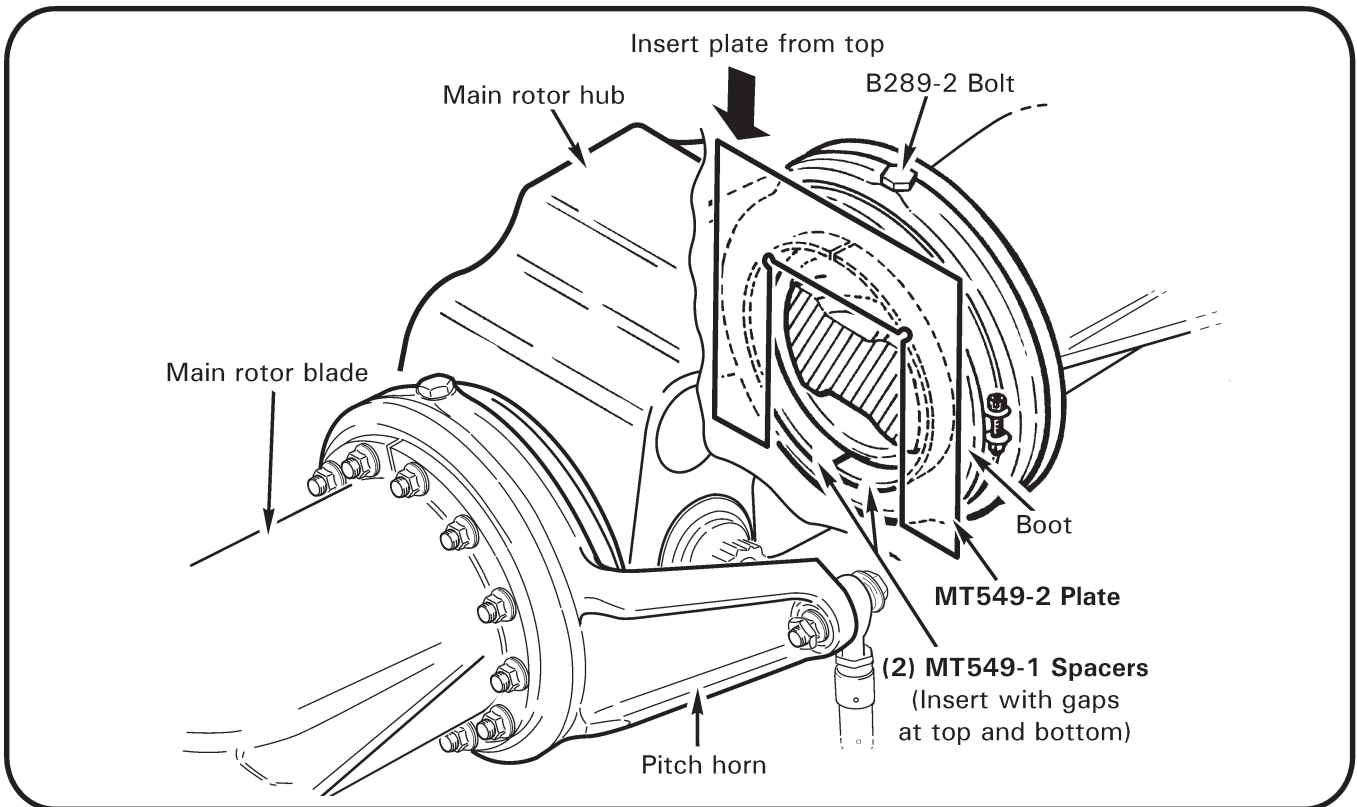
ADJUSTING BOOT CLEARANCE
